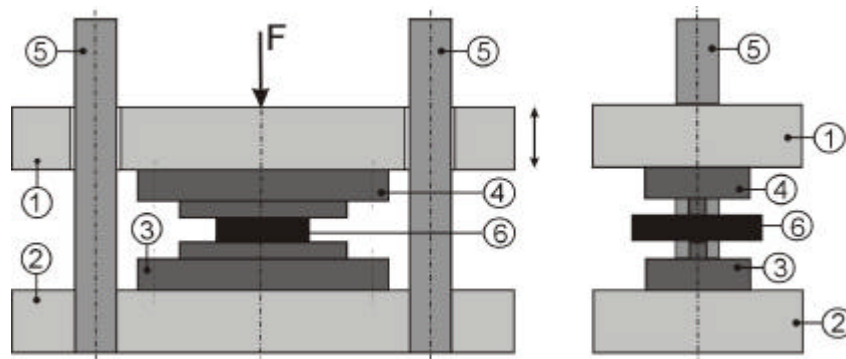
Cross sectional principle sketch of a two pillar punch guide with attached platen in width (left) and length (right) direction.
